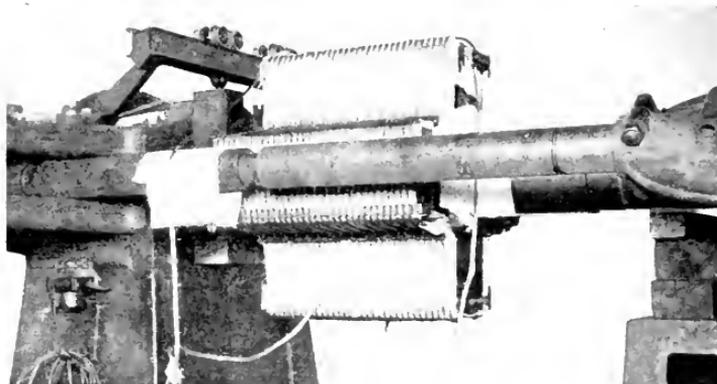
Rotor Spider of a 4-pole, 7,000-kv-a., 750-r.p.m. Waterwheel Driven Alternator Wound to be Heated Electrically by Induction. Primary winding consists of 32 turns of 430,000 cir. mil bare copper cable
